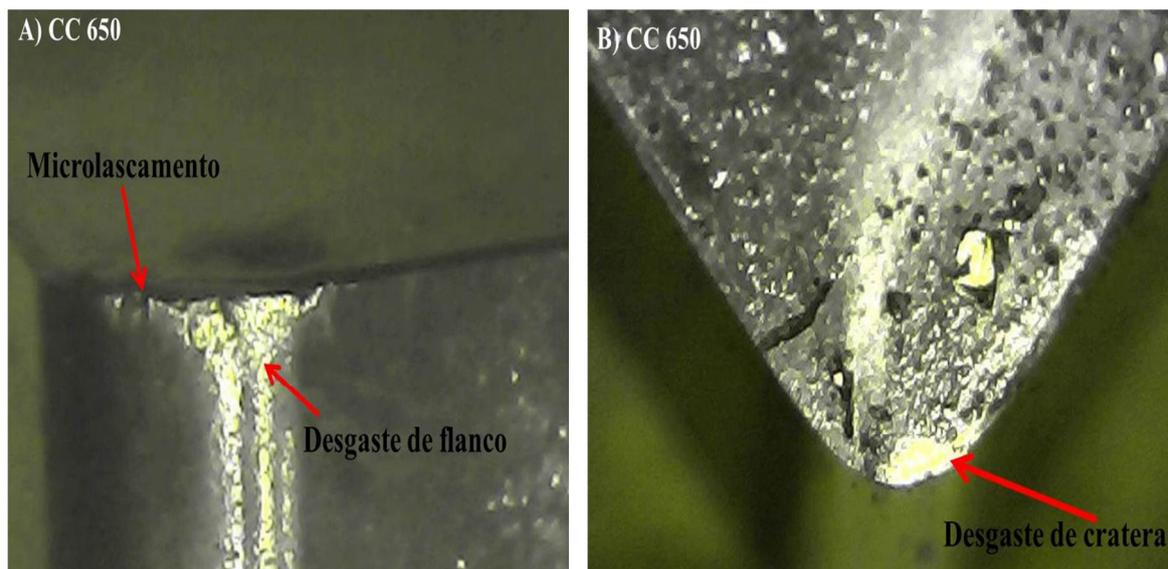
CC 650: (A) Clearance surface and (B) Output surface.
